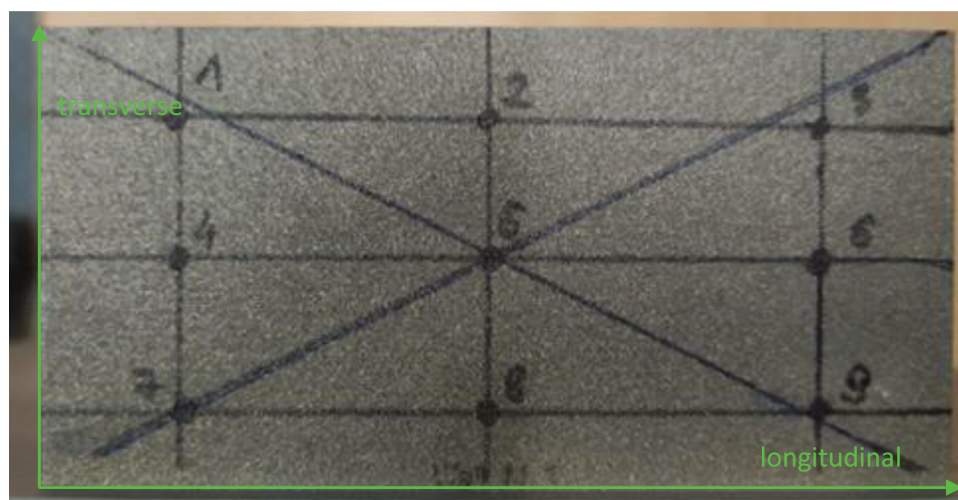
Wall-shaped specimen with location of measuring points for preliminary measurements before and after being cut off from the printing platform.
